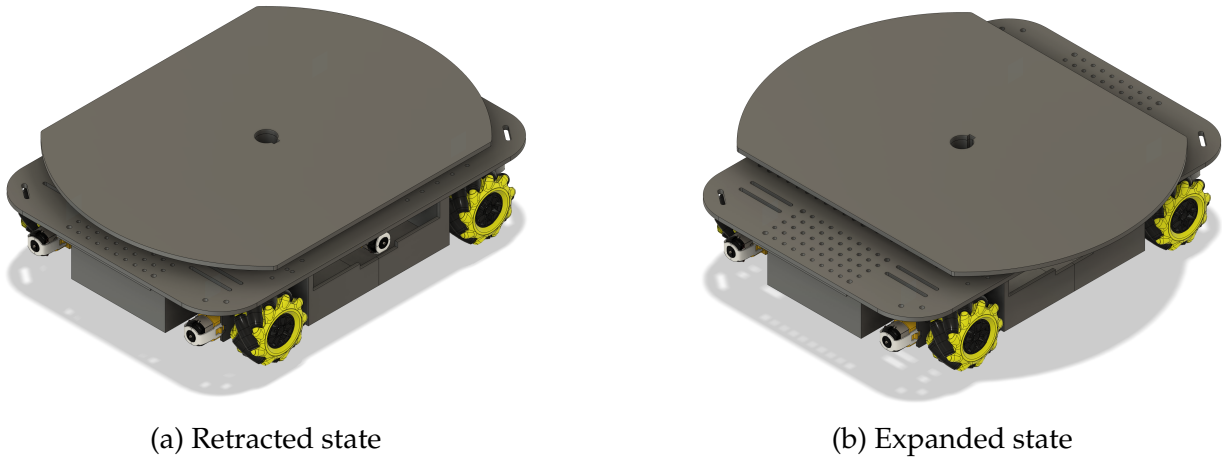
Rotary side-wing mechanism in the retracted and expanded states.
